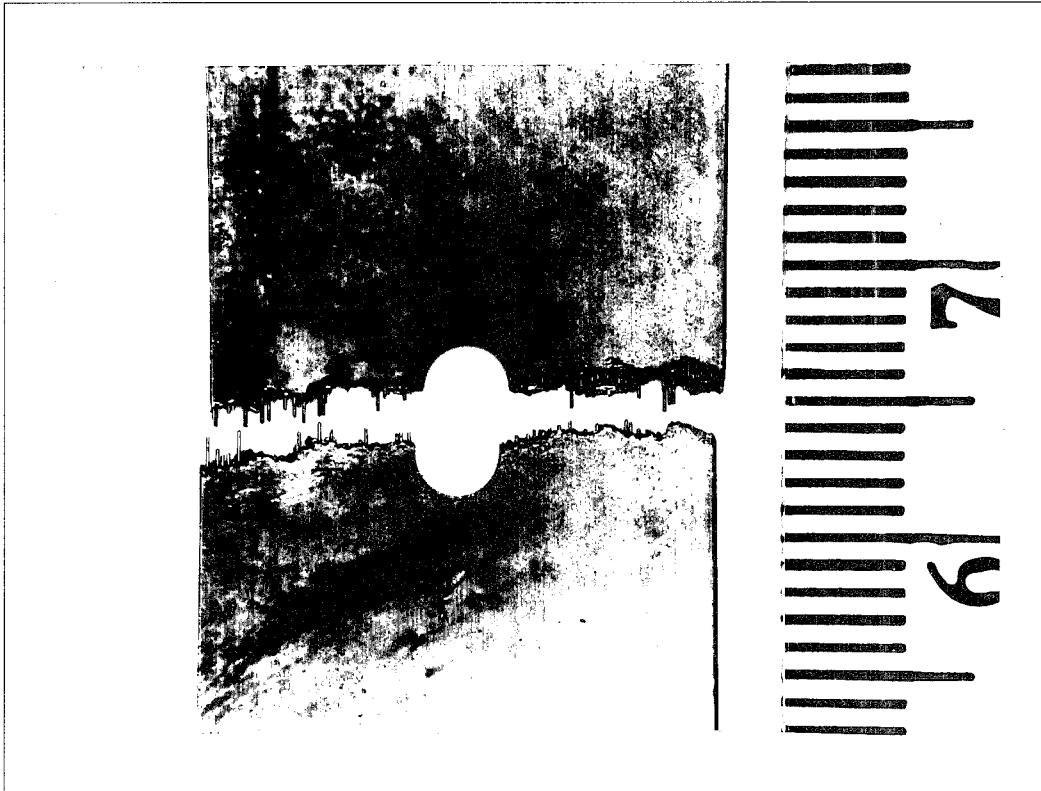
Monotonically Loaded Specimen Fracture Surface
